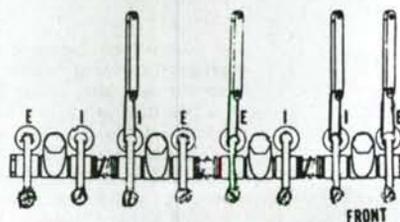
With No. 1 piston on TDC compression stroke on four-cylinder engines, adjust intake and exhaust valve clearance on No. 1 cylinder, exhaust valve on No. 2 cylinder and intake valve on No. 3 cylinder. Refer to Fig. 78.
